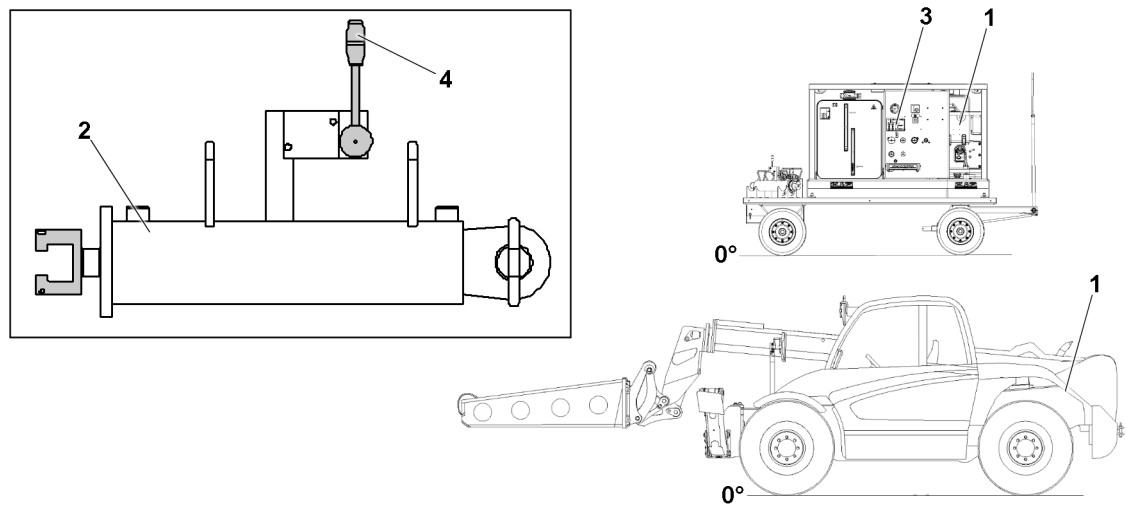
Hydraulic aggregate with pin pulling cylinder
